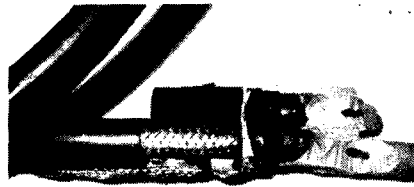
Cable Assembly, A-2, Post Surge Test Failure
